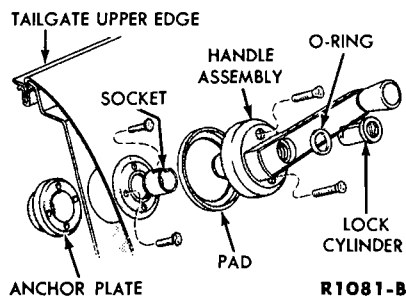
Tailgate Window Regulator Handle Installation—Typical
